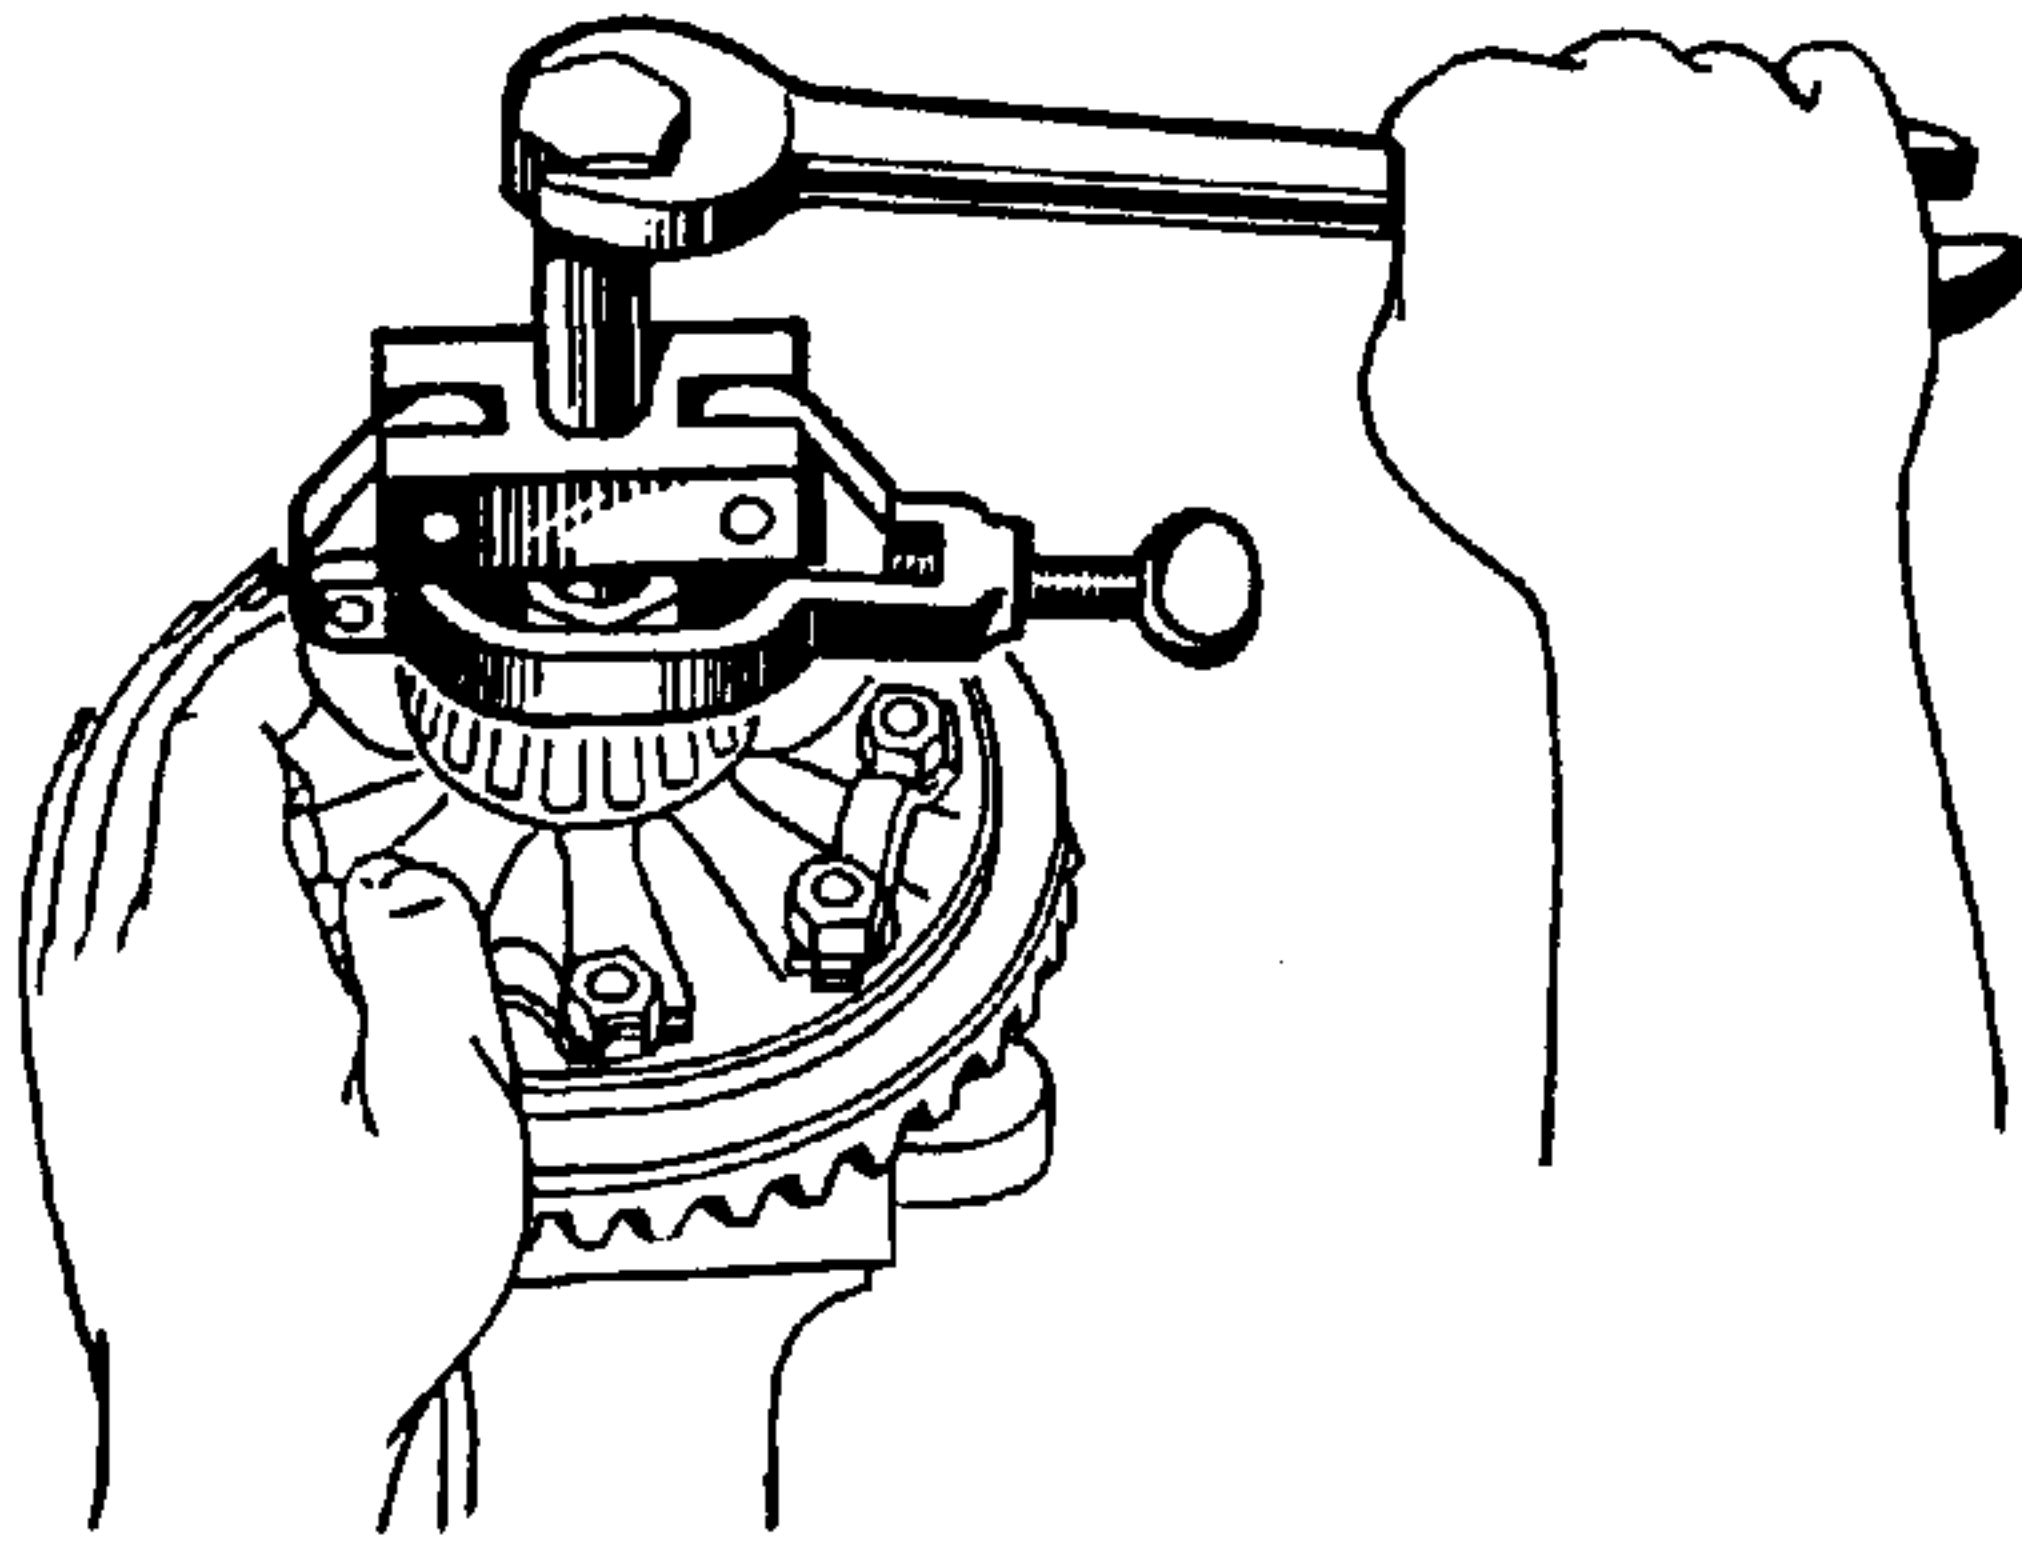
REMOVING DIFFERENTIAL BEARING CONE
